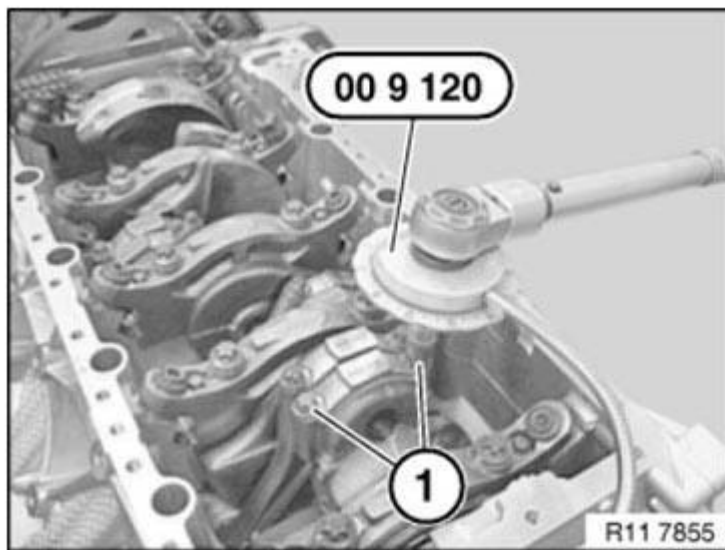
Tightening Down Connecting Rod Bolts With Special Tool 00 9 120
